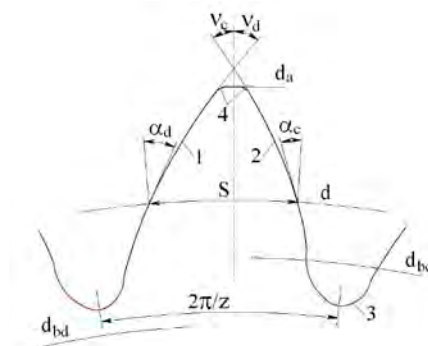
Asymmetric gear tooth profile; 1—drive tooth flank, 2—coast tooth flank, 3—tooth root profile, d_a —tooth tip circle diameter, d —reference circle diameter, S —tooth thickness at the reference diameter, d_{bd} and d_{bc} —drive and coast flank base circle diameters, v_d and v_c —drive and coast flank involute intersection angles, α_d and α_c —drive and coast flank profile angles at the reference diameter, z —number of teeth.
